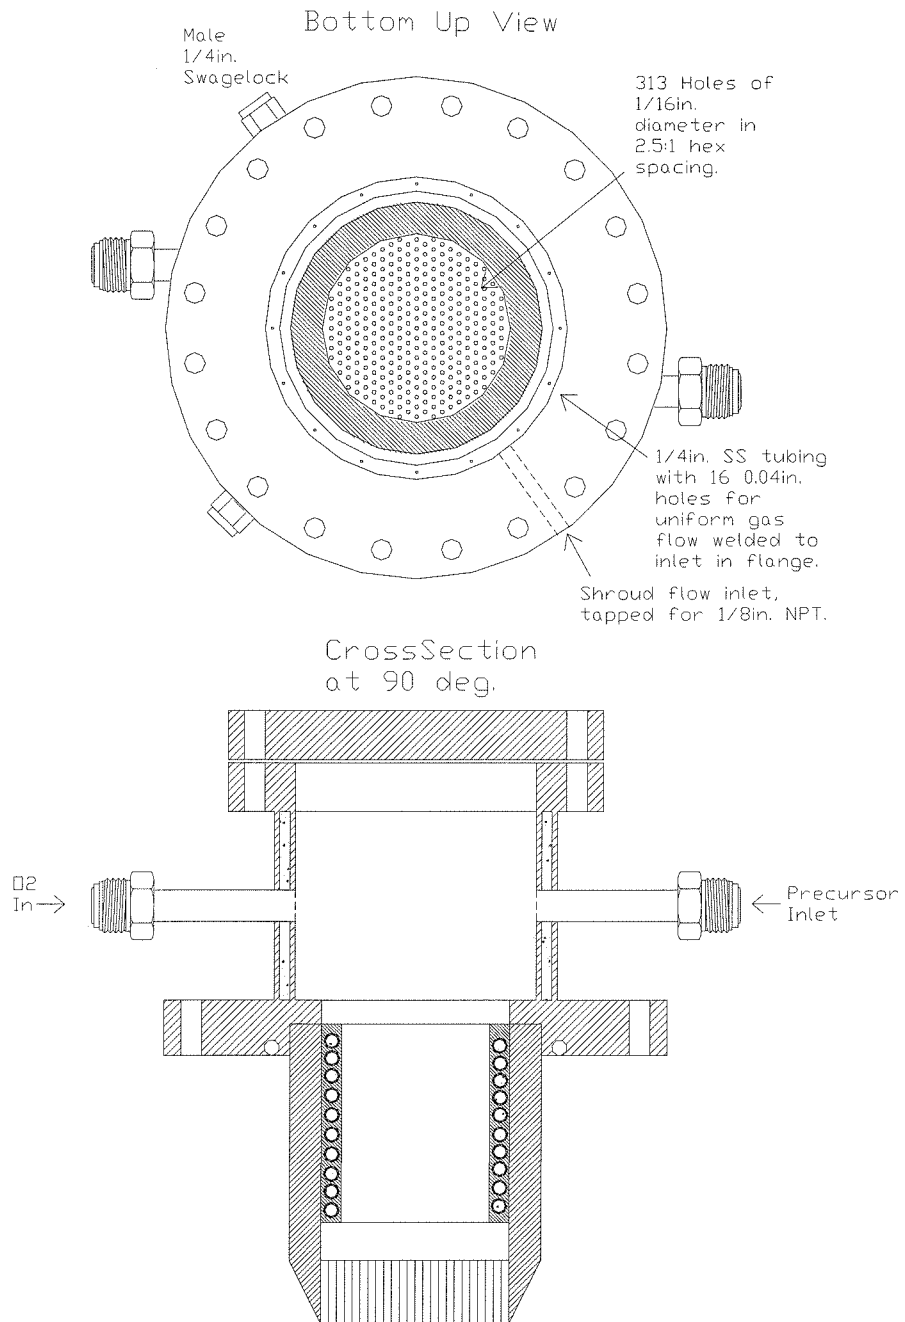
Bottom up and 90° cross-sectional views of the showerhead final design.
